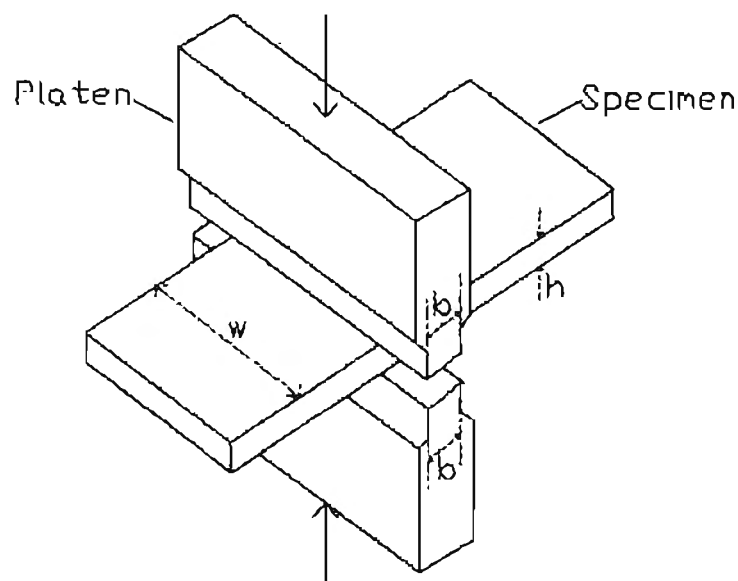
PSC testing assembly (after Duckham<sup>10</sup>).
